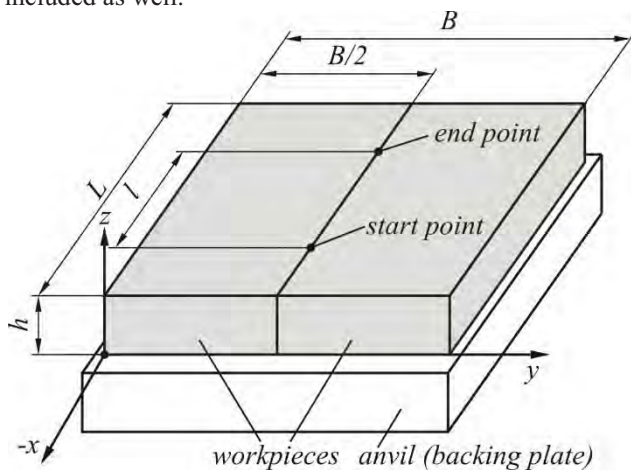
Scheme of the positioned workpieces in position for welding
